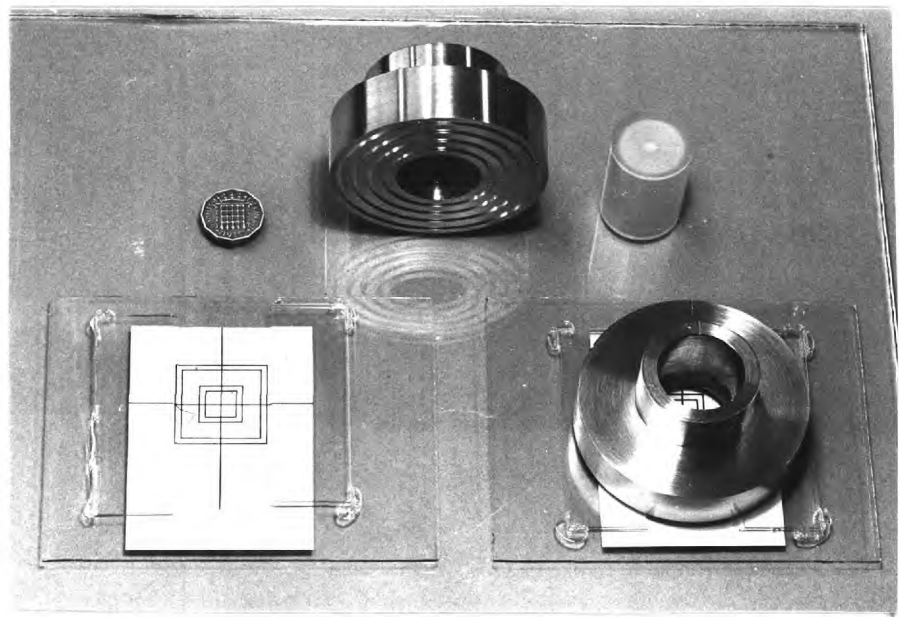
Grinding Block and Perspex Cylinder, showing some details of the arrangement employed for mounting the specimens.
